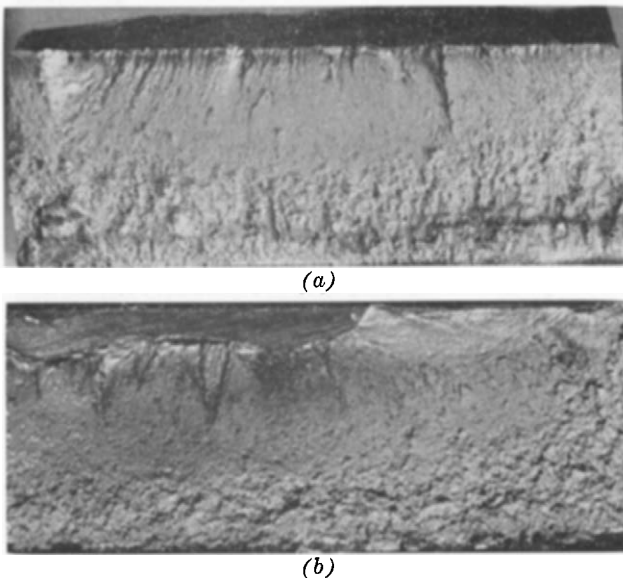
(a) Fractured Surface of Sound As Welded and (b) Welded Undercut Bending Fatigue Specimens. The Fatigue Crack Has Propagated Across the Section From One Surface Location.
